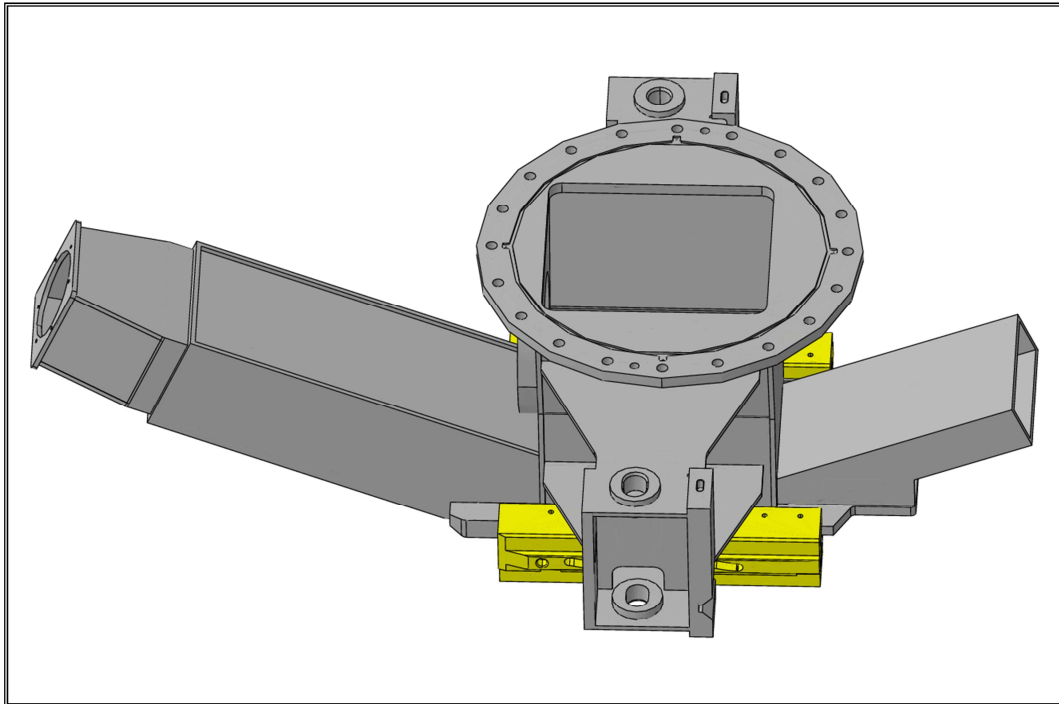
Mock-up 3D geometric model. Target Assembly and Back-Plate lateral view.
